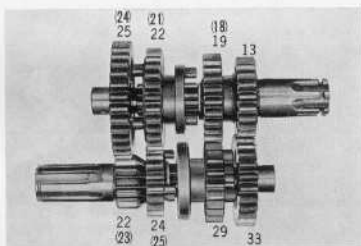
Number of gear teeth, ( ) indicate CD 90
